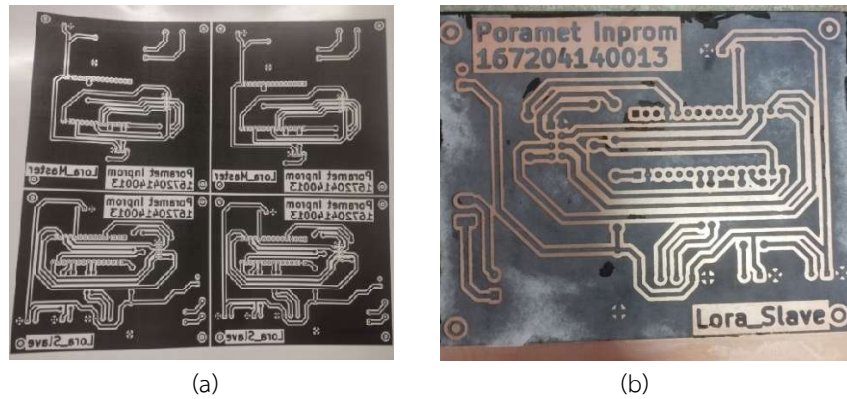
Printed circuit layout on photo paper (a), transferring the printed circuit board (b).
